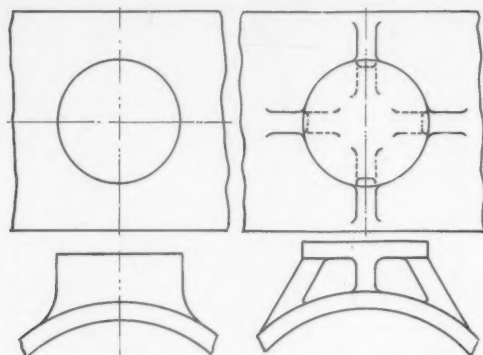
POOR (LEFT) AND GOOD DESIGN (RIGHT) OF BOLTING PADS ON CYLINDER.
